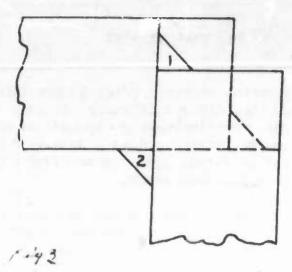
Cross Sectional View of a Typical Interlocking Joint.
